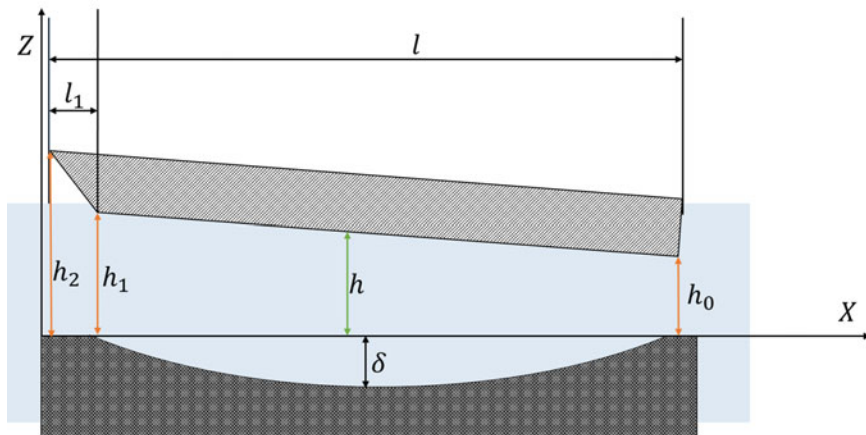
Schematic diagram of chamfered thrust pad bearing
